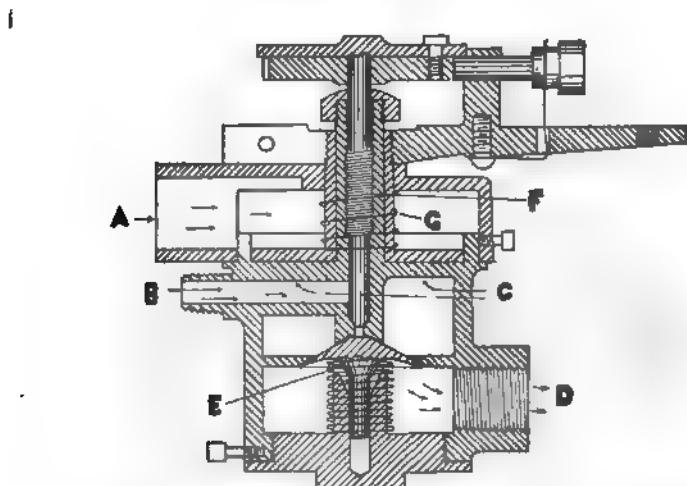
Sectional Diagram of the Haynes-Apperson Throttling Mixer. A, air inlet; B, gasoline inlet; C, C, location of air ports into mixing chamber; D, vapor exit to engine. E, mushroom valve held on seat by spring, opened by suction of engine piston; F, threaded needle valve spindle; G spring for raising upper member of air chamber when released by screw motion of the levers attached to cover retaining screw and needle valve spindle, both being raised or lowered by the same movement.
